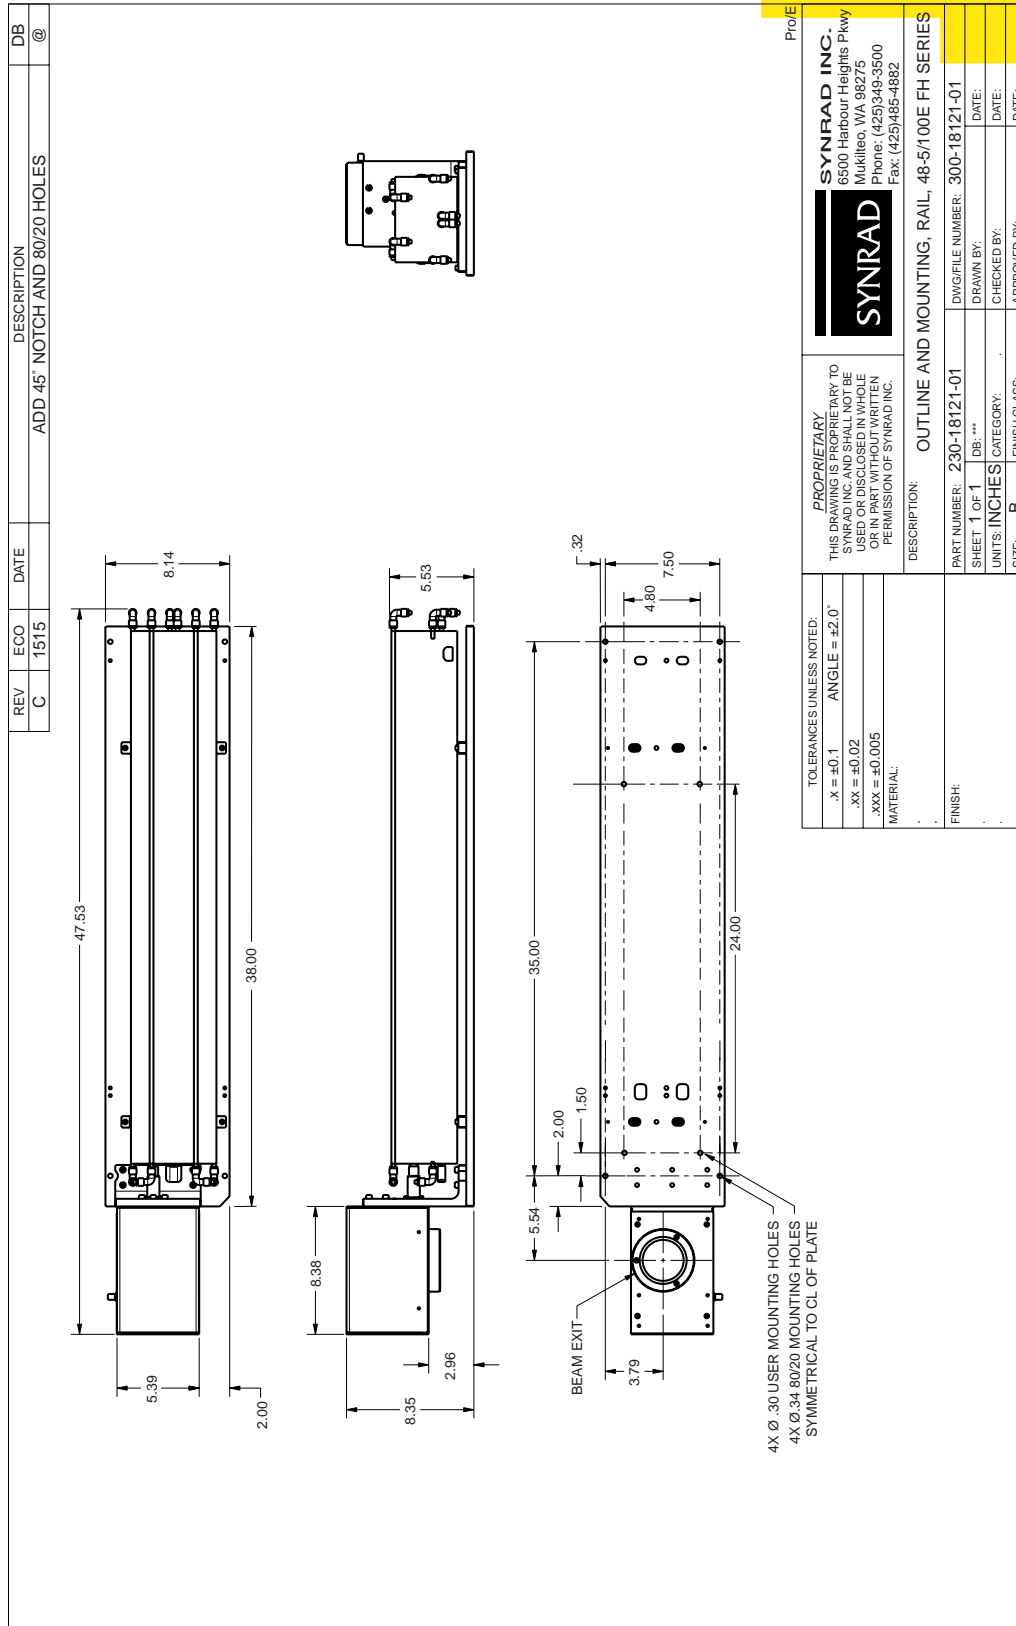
FH Head / Model 48-5/Evo 100 package outline and mounting dimensions
